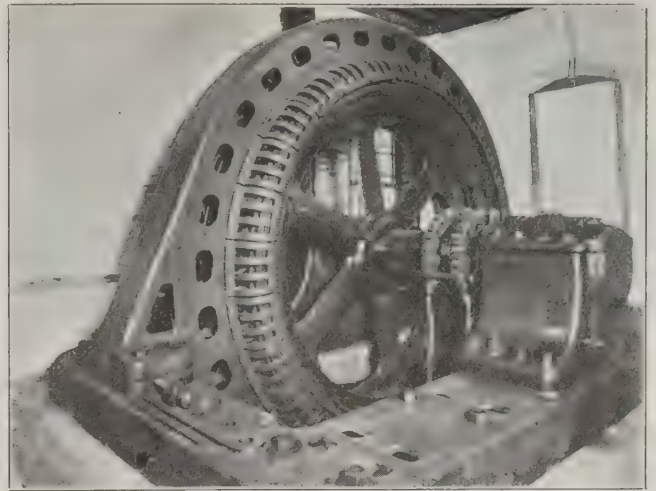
1600 HP. A. C. MOTOR DRIVING 6-ROLL CONTINUOUS BILLET MILL.
